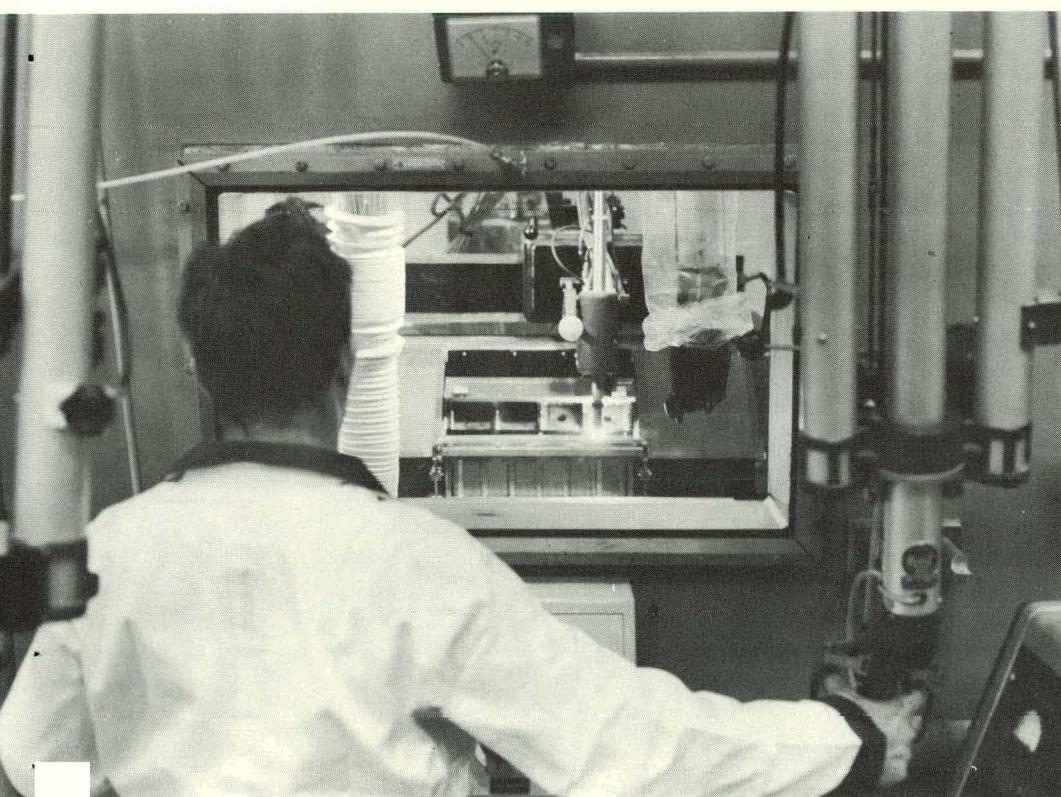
Remote welding of stainless steel encapsulations.
